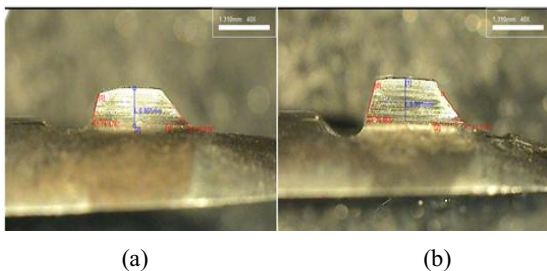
Image of the tip of deburring tool (a) Tool 1 and (b) Tool 2
